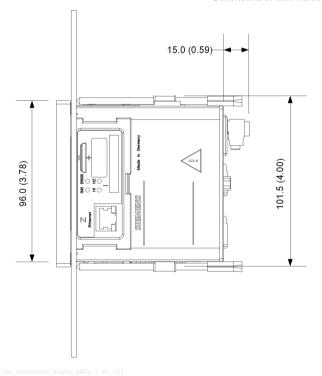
Dimensional Drawing of SICAM P850/P855 with Display
